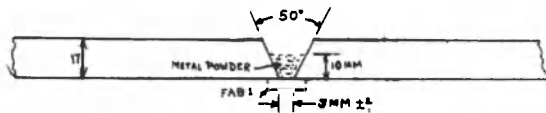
JOINT DESIGN FOR (FAB) ONE SIDE WELDING
